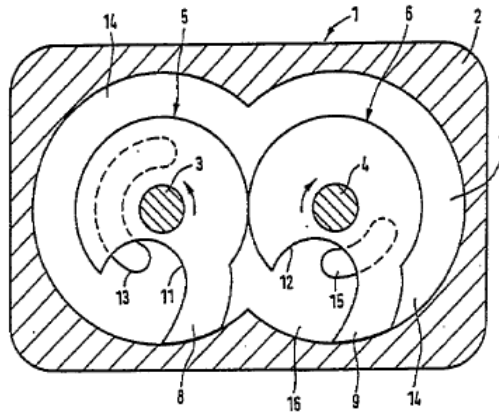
Single claw rotor pump in DE19629174 [4]
